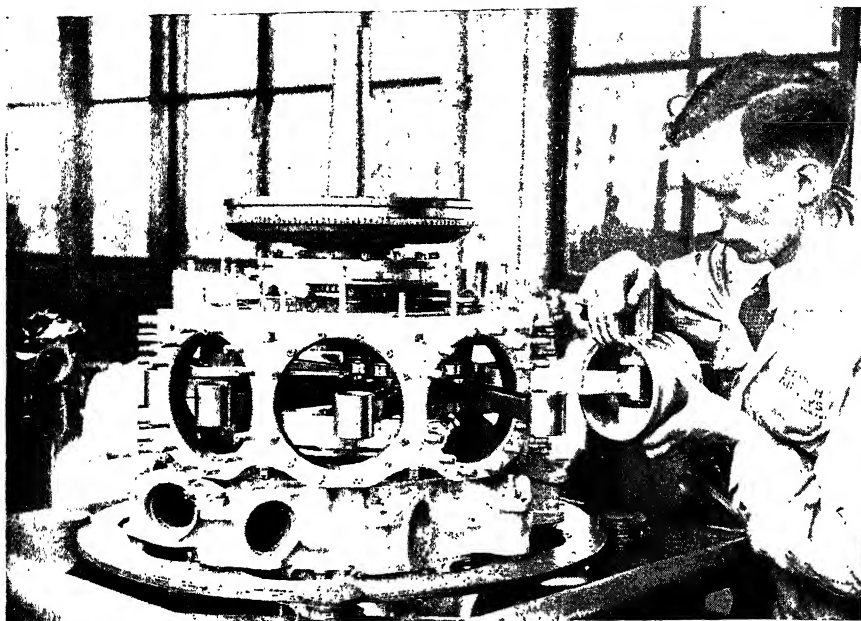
FITTING GUDGEON PIN IN PISTON
